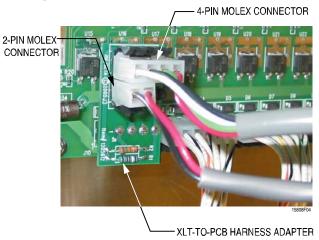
2 and 4-pin Molex connectors connected to XLT-to-PCB harness adapter, which is connected to J10 on the main dispenser PCB
